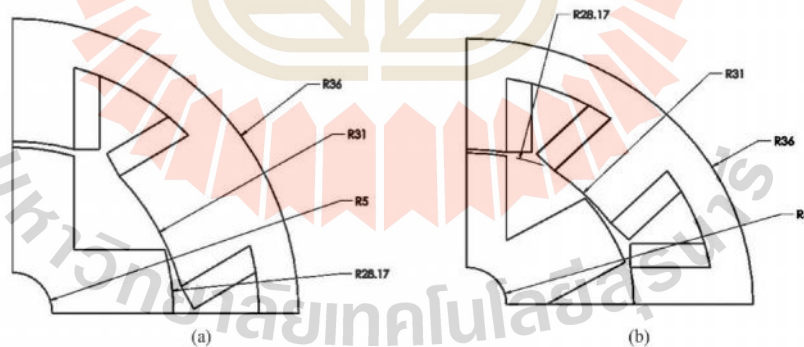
The geometry of the tested SRM with dimension (mm) (a) the 6/4 poles SRM (b) the 8/6 poles SRM
